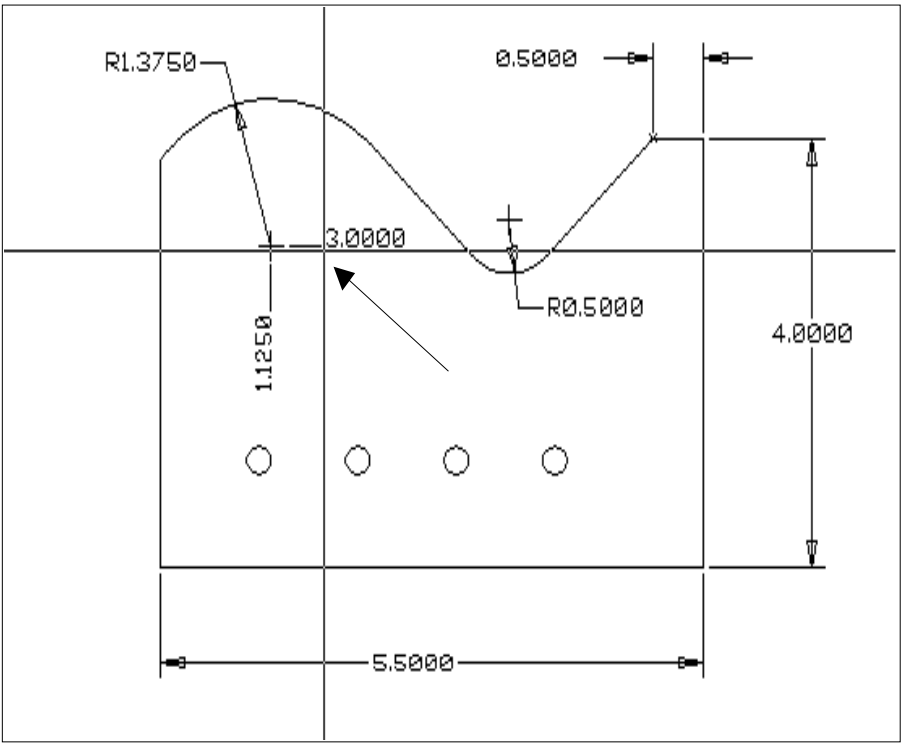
Dimensioning the Y center of the 1 3/8" radius
